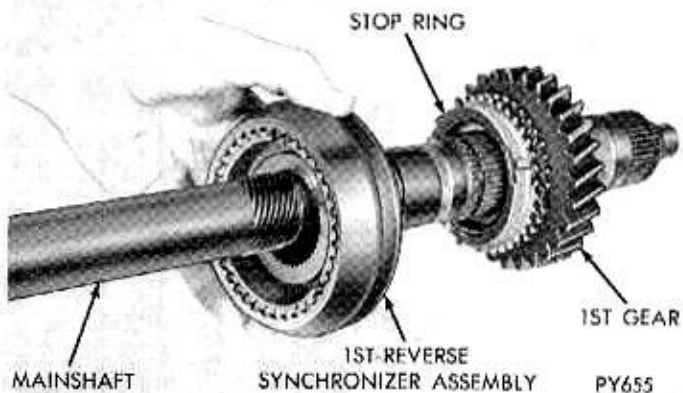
1st-Reverse Synchronizer Assembly—Removal or Installation
